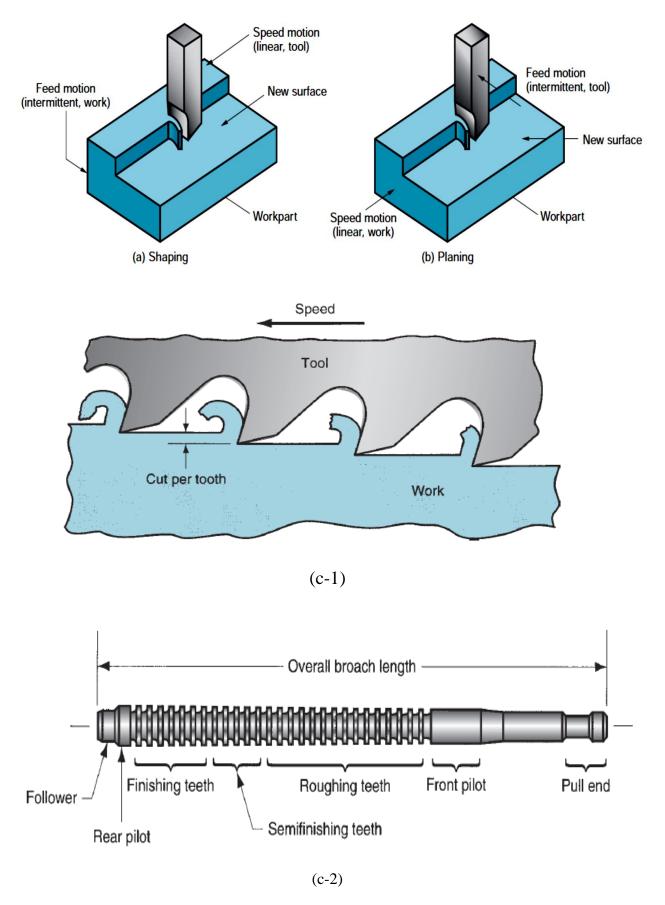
(a) shaping, (b) planing, (c-1) external broaching, (c-2) internal broaching
